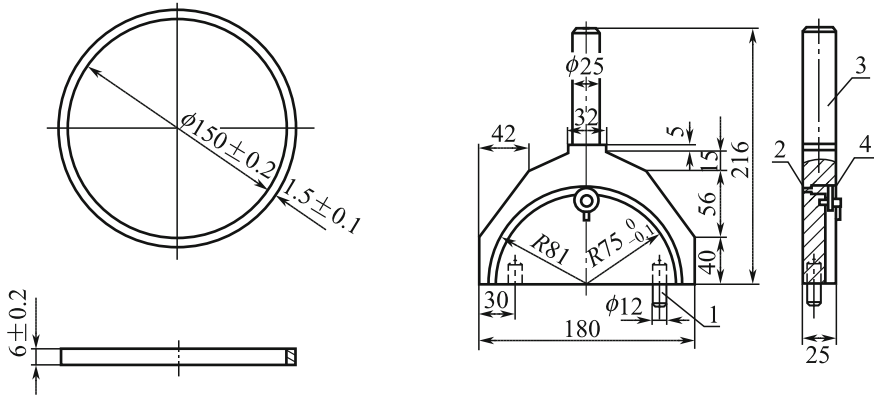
Jigs for NOL ring tensile test 1—positioning pin; 2—access hole; 3—disk; 4—closure cam
